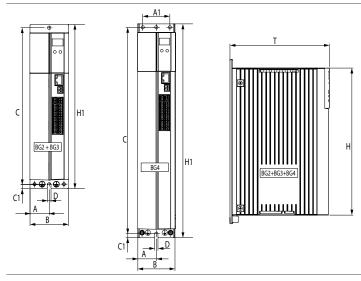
Dimensions (in mm) – BG2, BG3, BG4
